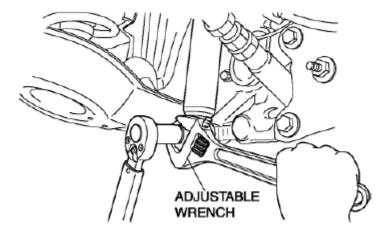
Tightening Rear Shock Absorber Lower Side Bolt
